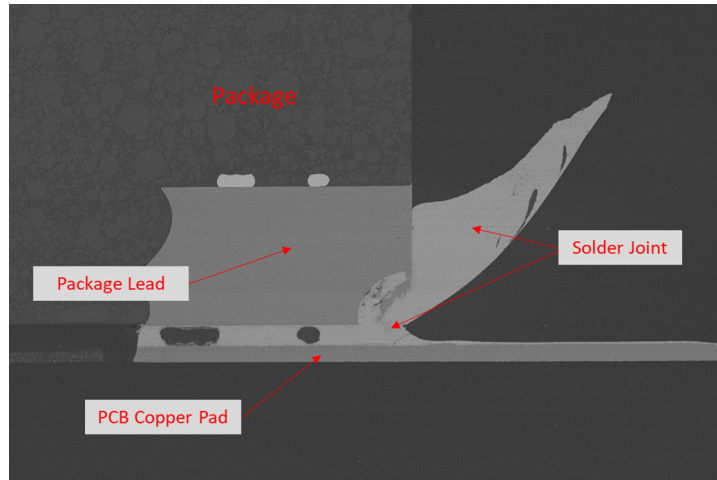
SEM Photo of hand-made crack on the solder joint, the small crack inside is caused by vibration
